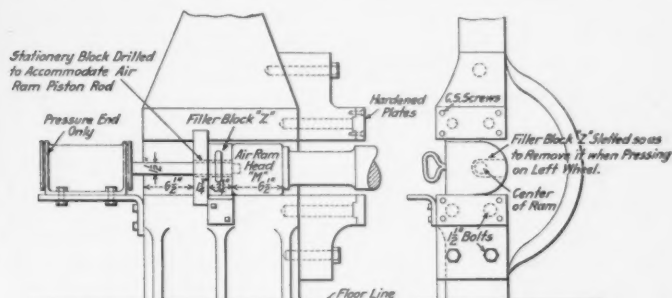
Arrangement of Outboard Housing for Mounting Press
